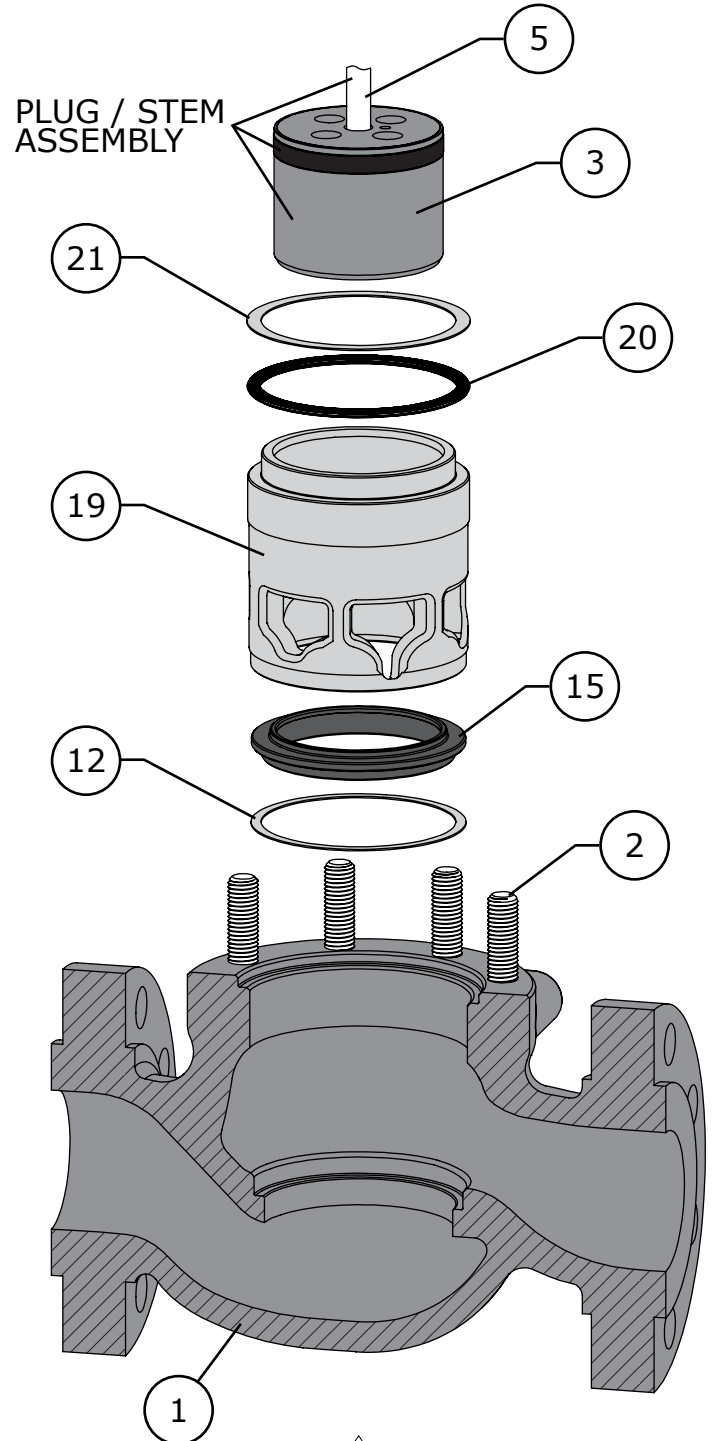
Standard Trim Parts Removal (Steps 1 - 6)
